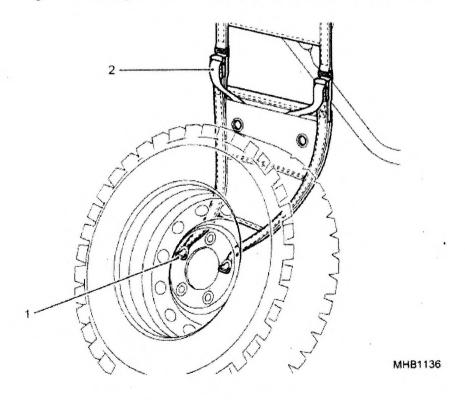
Removing the rear mounted spare wheel using the lifting harness
